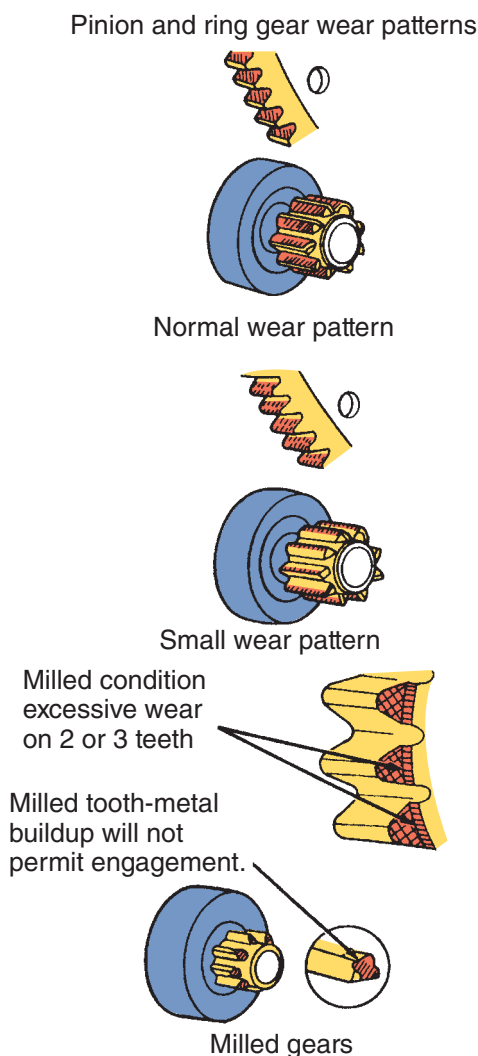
Starter drive and flywheel ring gear wear patterns.
